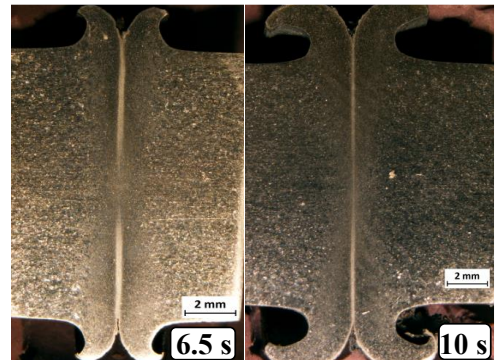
Macro-graphic view for welding joint of 6.5 s and 10 s
